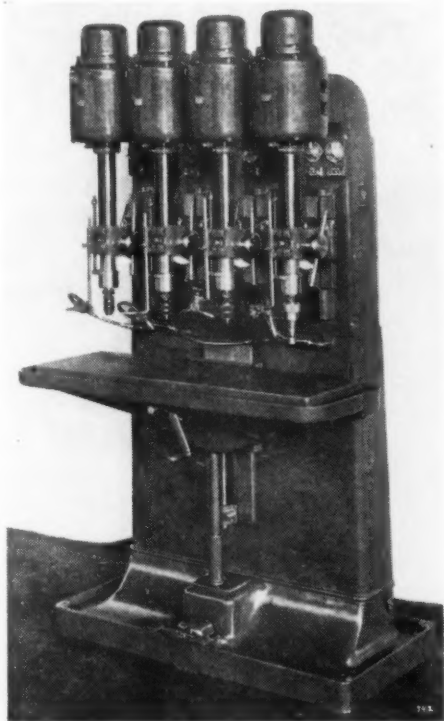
THREE-CYCLE SIX-SPEED MOTORS ON A DRILLING MACHINE
